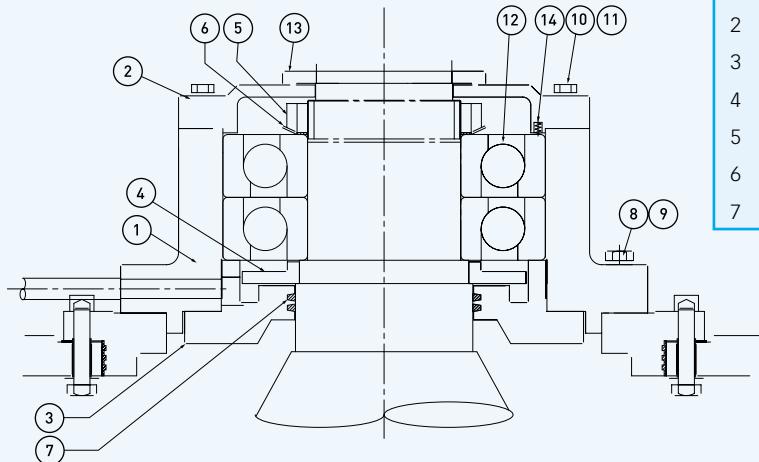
Replacement Procedure for Upper Bearing(Upper Bearing Assembly Drawing)
